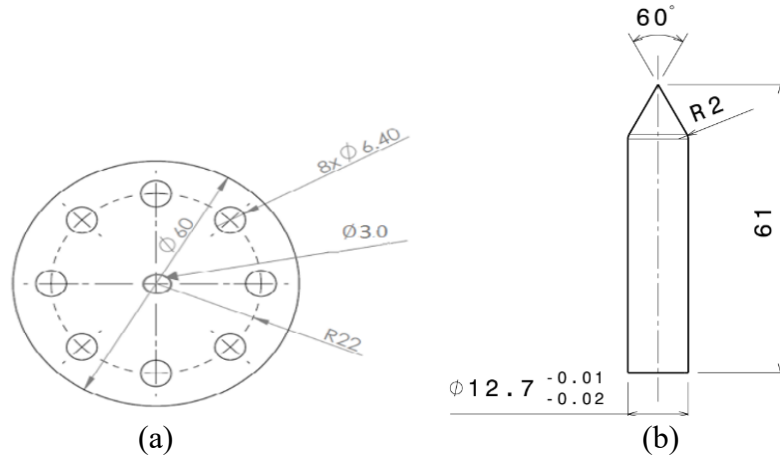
Hole expansion (a) specimen and (b) punch dimensions in mm
